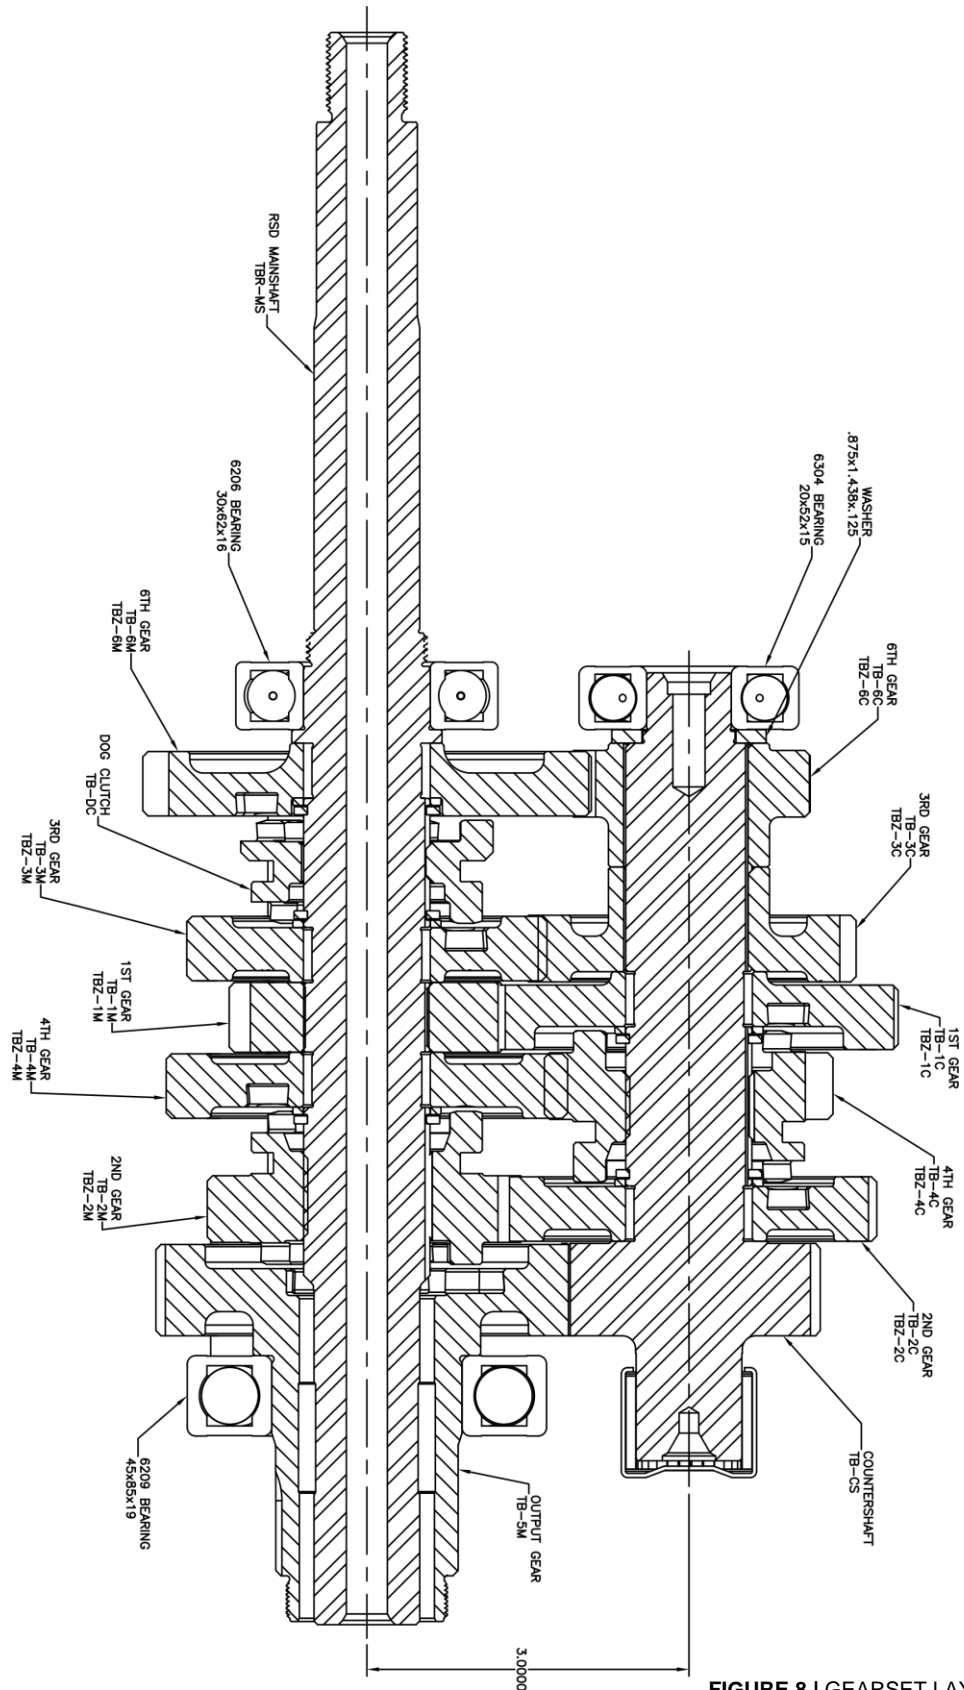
| GEARSET LAYOUT, TORQUEBOX 6-SPEED RIGHT SIDE DRIVE (RSD)
